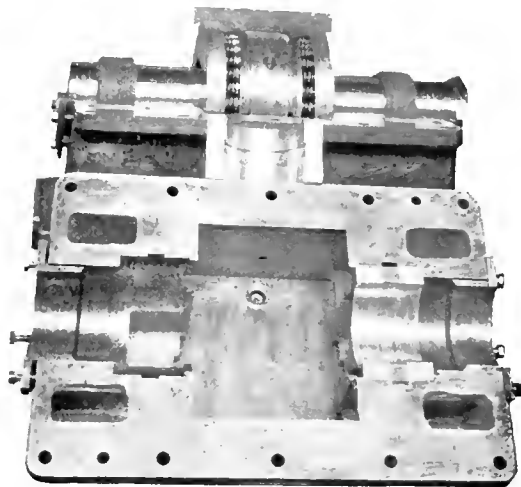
Spring Thrust Bearing Installed on Steam Trawler
